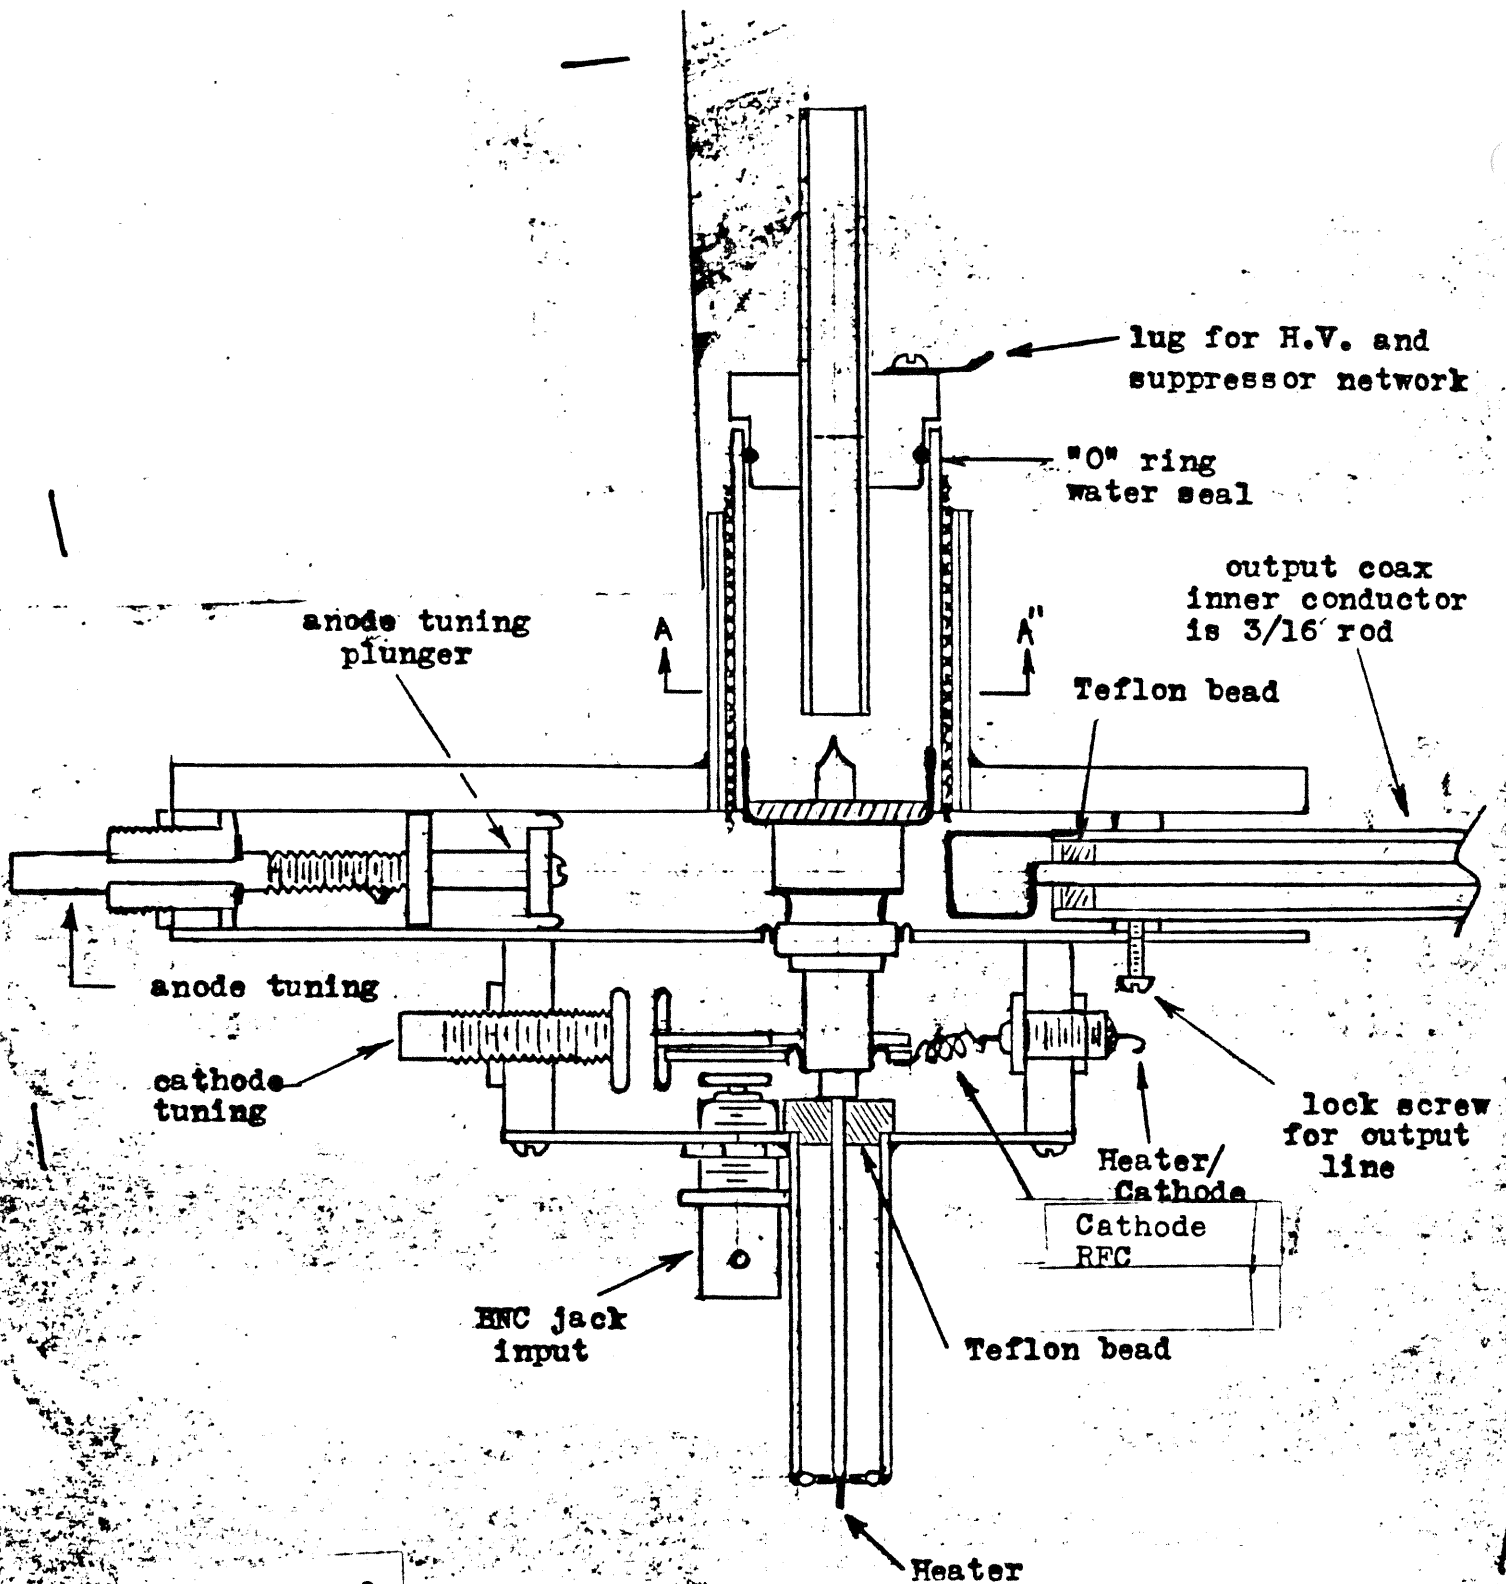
Exposed side view showing assembly details. See other drawings for dimensions. This drawing is approximately full scale.
